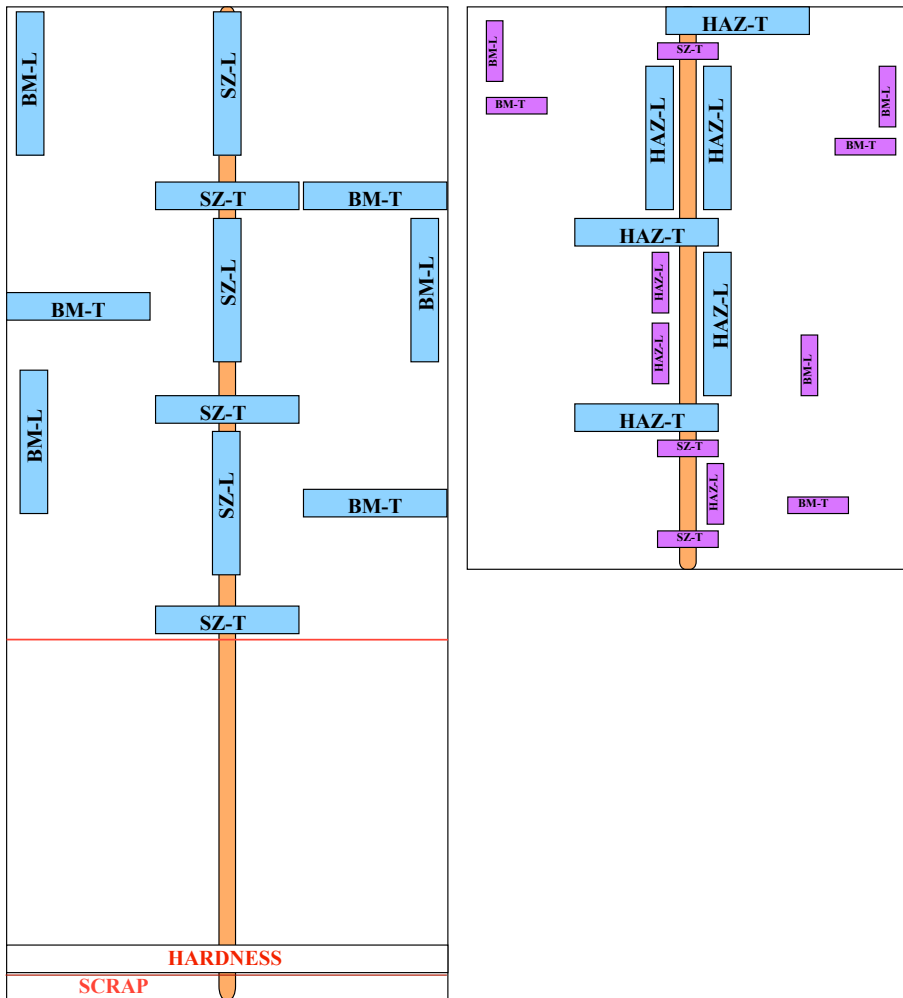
Location of samples used for the tensile and Charpy V-notch testing of the FS welded plates.
